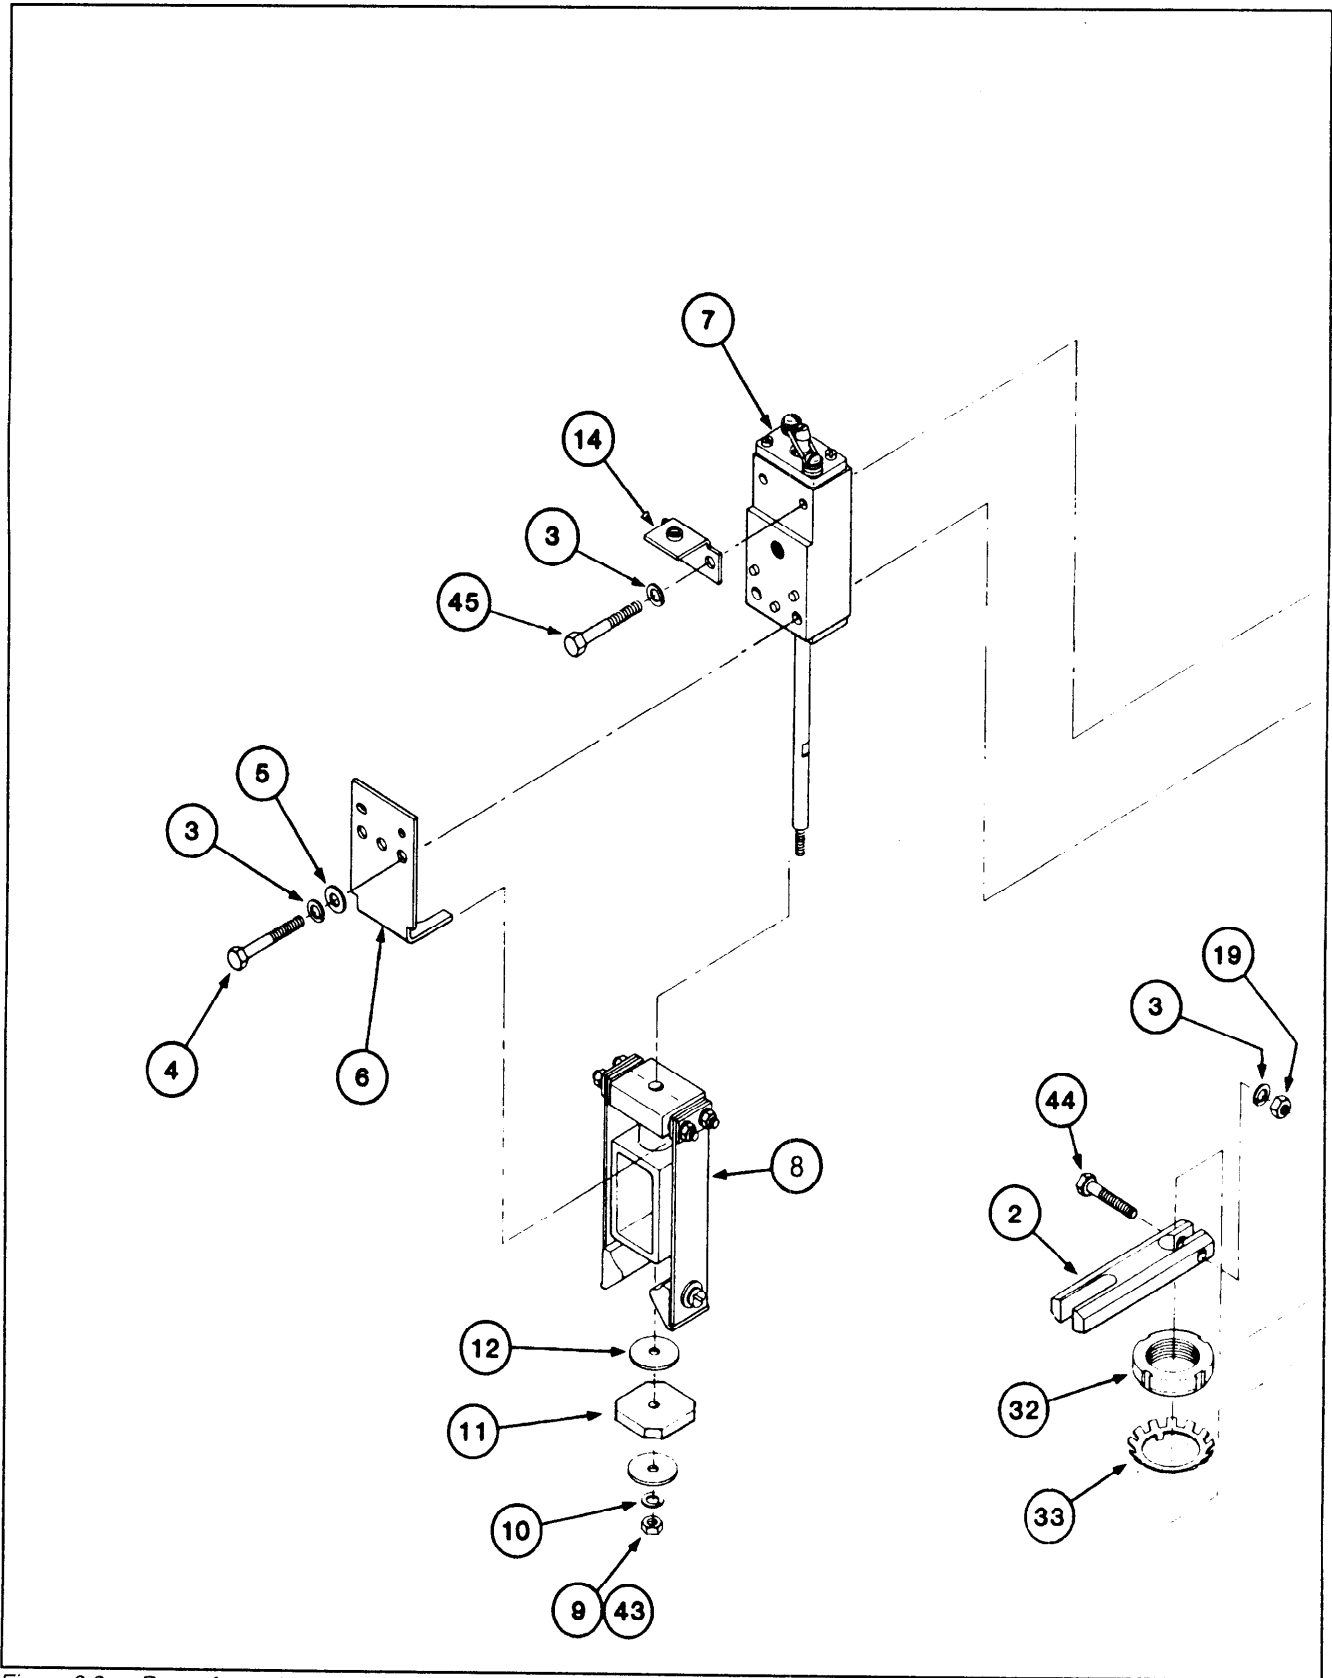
Pump Assembly (Drawing 1 of 2).
